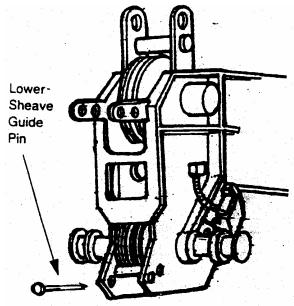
Remove Lower Sheave Cable Guide Pin To Avoid Cable Interference When Lifting Lead Tower into Upright position.
